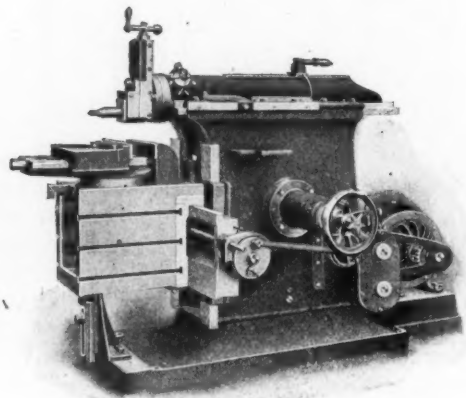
24-IN. MOTOR DRIVEN SHAPER.
